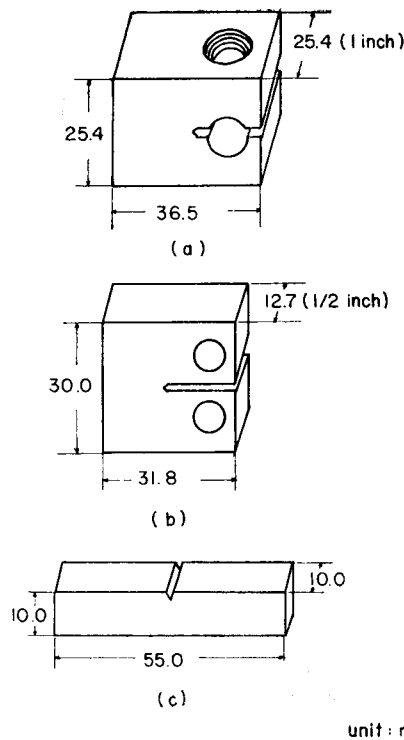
Fracture Toughness Test Specimens. (a) 1 T WOL Specimen, (b) ASTM E-399 Type 1/2T C/T Specimen, (c) ASTM E-23 Type Charpy Impact Test Specimen.
